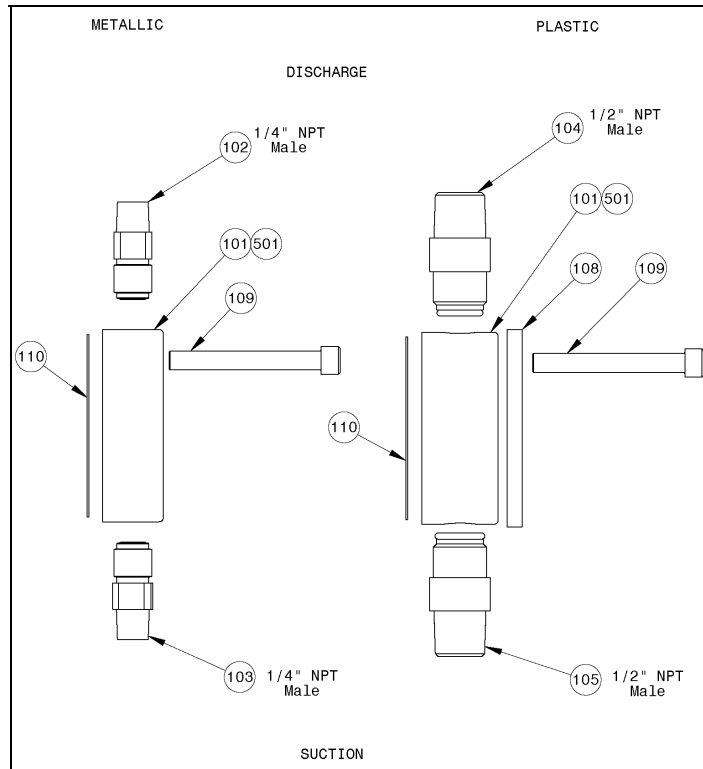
Metallic/Plastic, Head Assembly, Size A.
